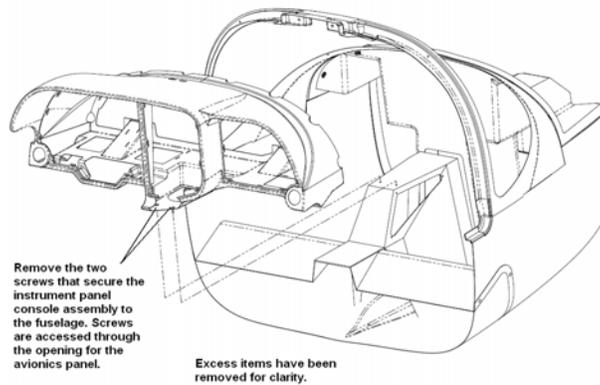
Location of the Two Screws that Secure the Instrument Panel Console to the Center Console
